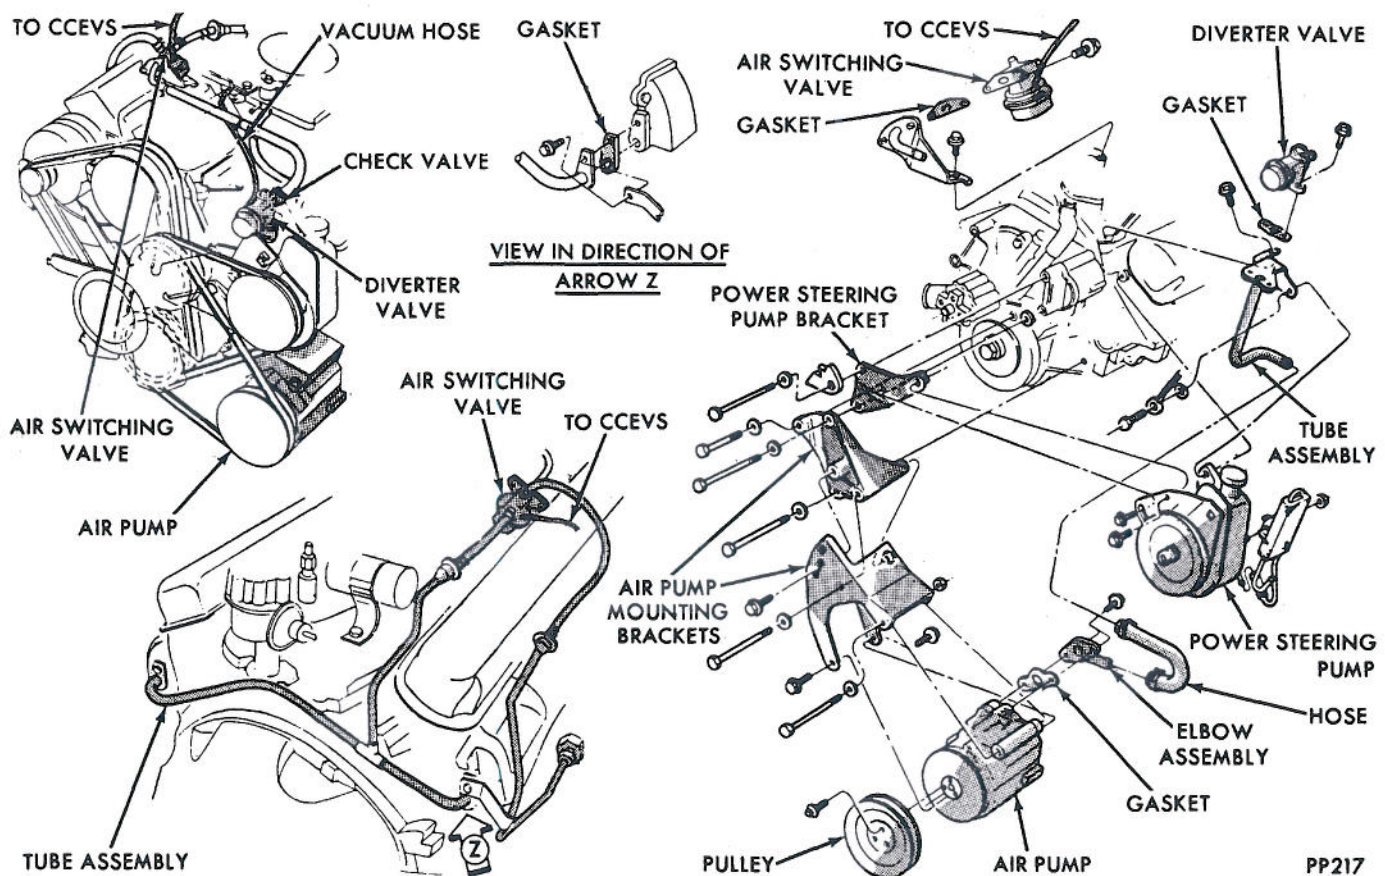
Air Injection System Installation for 318 and 360 CID Engines
